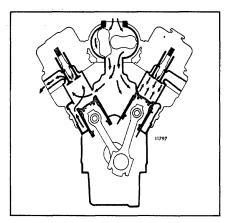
Air Intake System Through Blower and Engine (6V-53 Engine)
